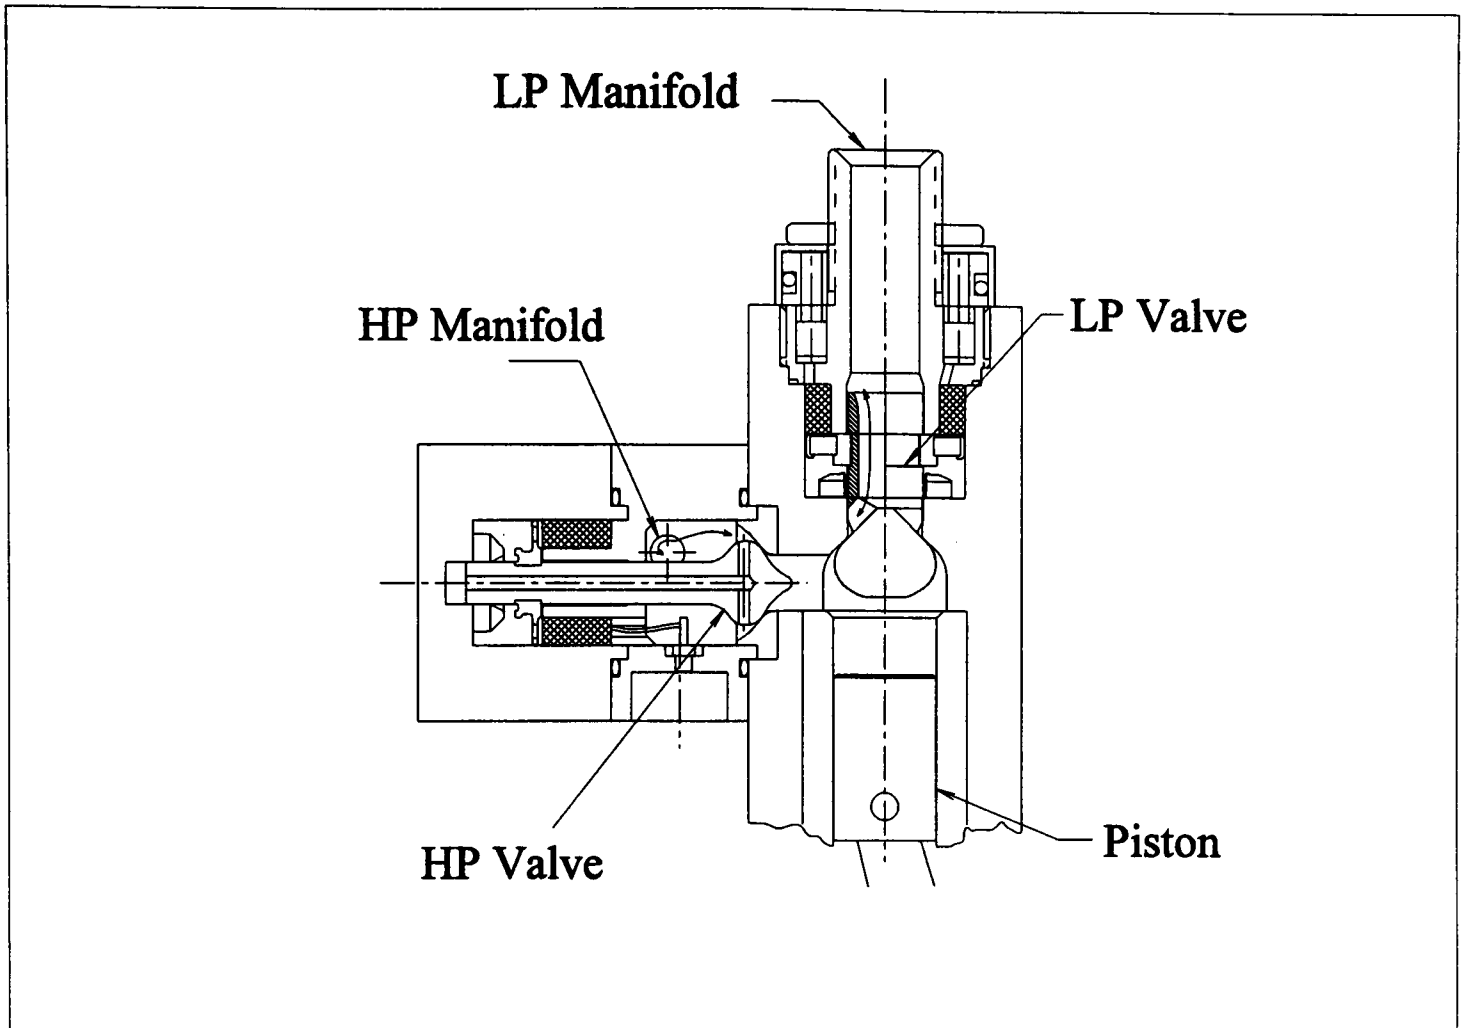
Cylinder head arrangement of a digital- displacement pump-motor
